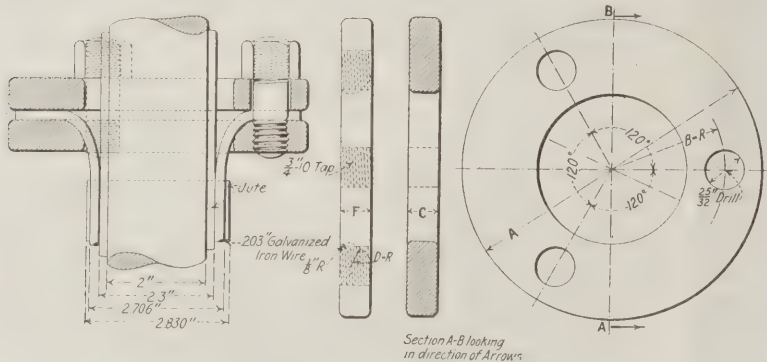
DETAILS OF A FLANGE CABLE SUPPORT
